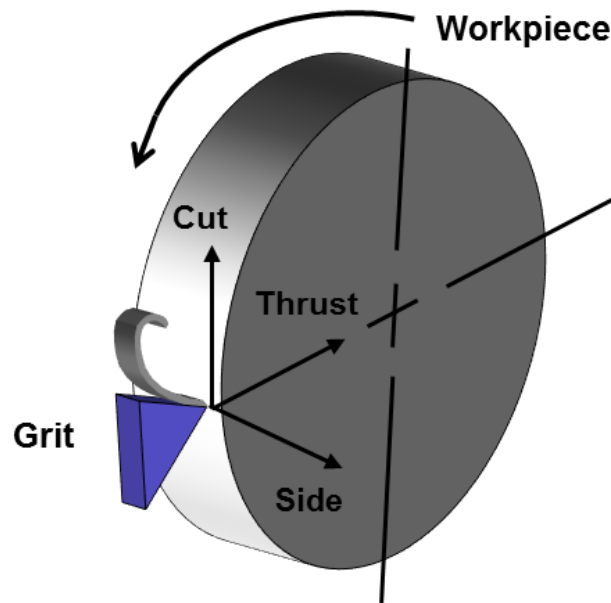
Grit and Workpiece Setup with Cut, Thrust and Side Force Components
